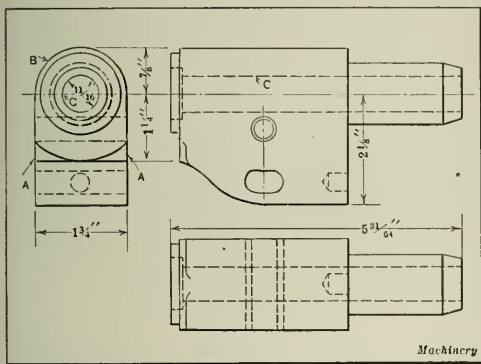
Design of Piece to be shaped on the Machine shown in Fig. 4
